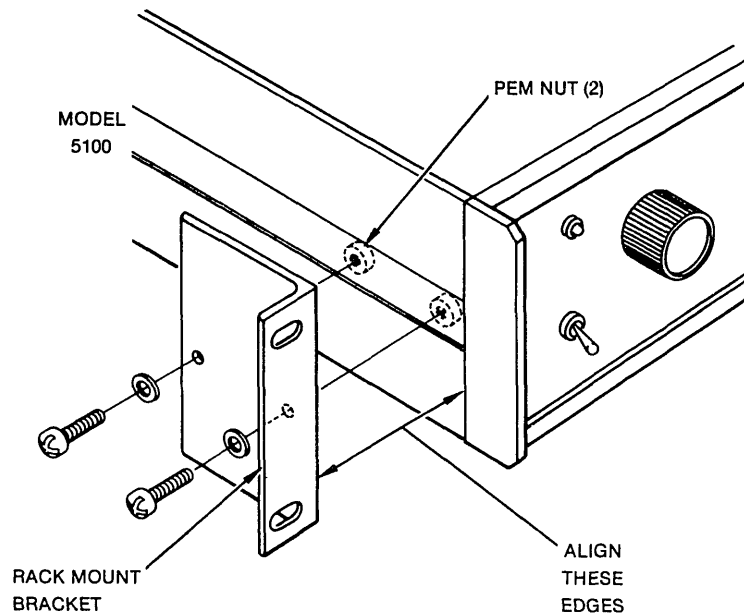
Installing Rack Mount Bracket on Model 5100
